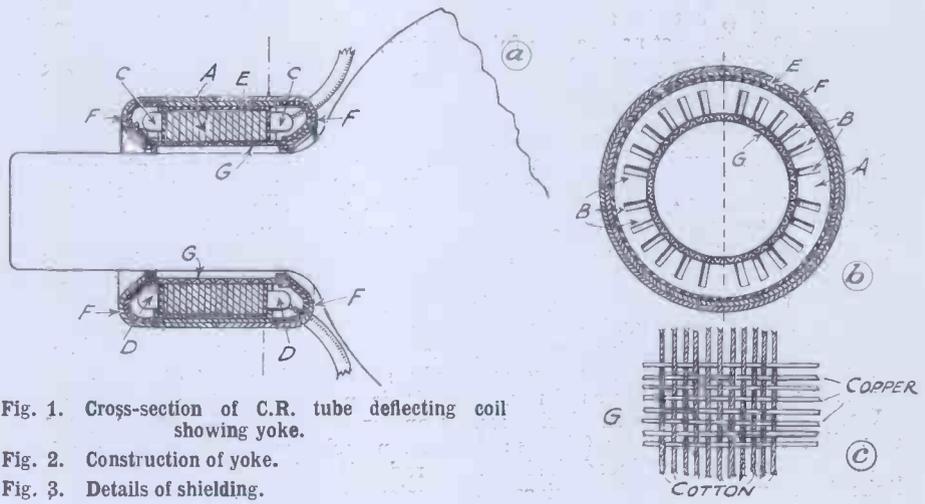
Cross-section of C.R. tube deflecting coil showing yoke.
